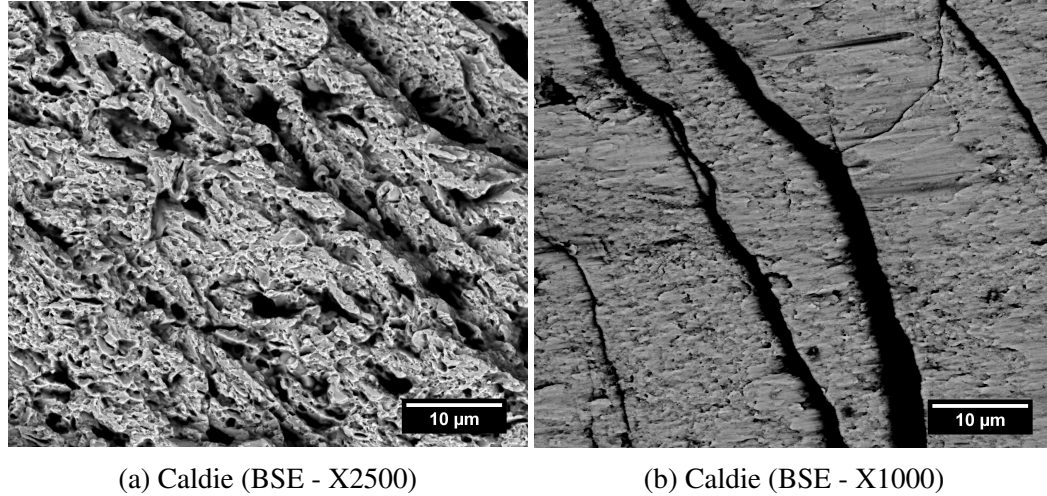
SEM images of fracture surfaces on Caldrie specimens tested in compression
